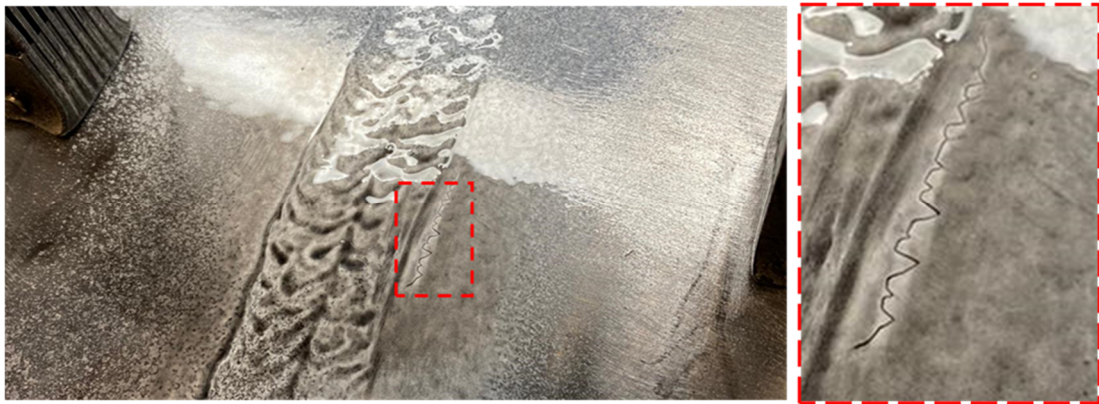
Magnetic Particle Testing (MT) applied to a carbon steel plate weld. These images were taken by the author during a practical NDT course at Lavender NDT Intl.
